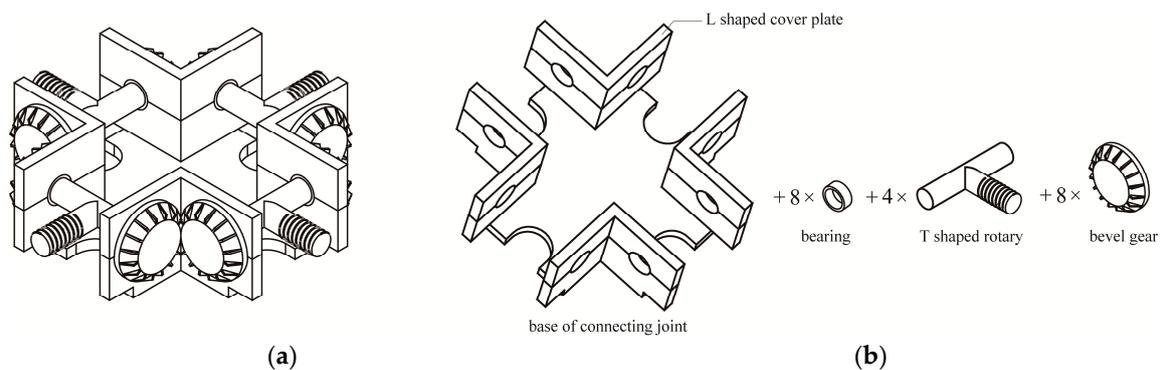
Design of a joint with four pairs of bevel gears and connected to $n_1 = 4$ link members: (a) Sketch of the joint model; (b) basic components, including base, cover plate, bearing, rotary, and bevel gears.
